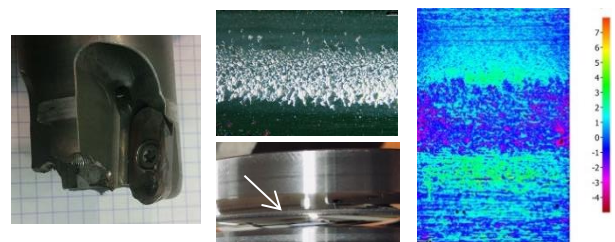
Bearing failure of Dam1 spindle condition.
